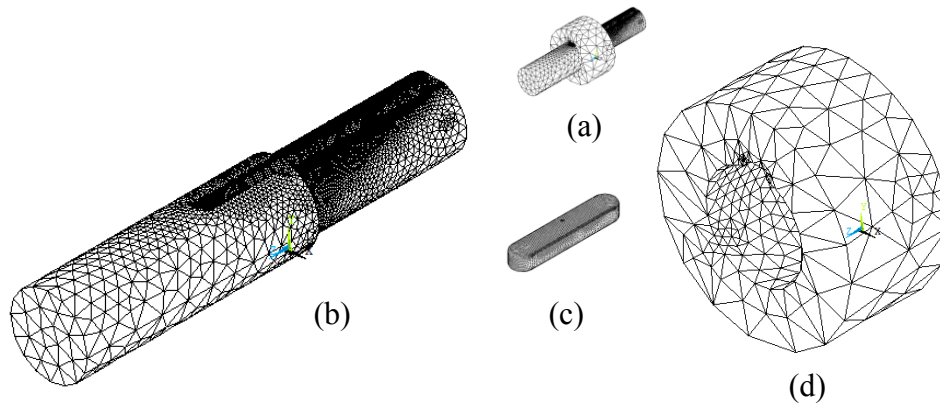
FEM model of bending model of hub, key and a stepped shaft with end milled keyway, (a) Assembled parts, (b) Shaft, (c) Key, (d) Hub
